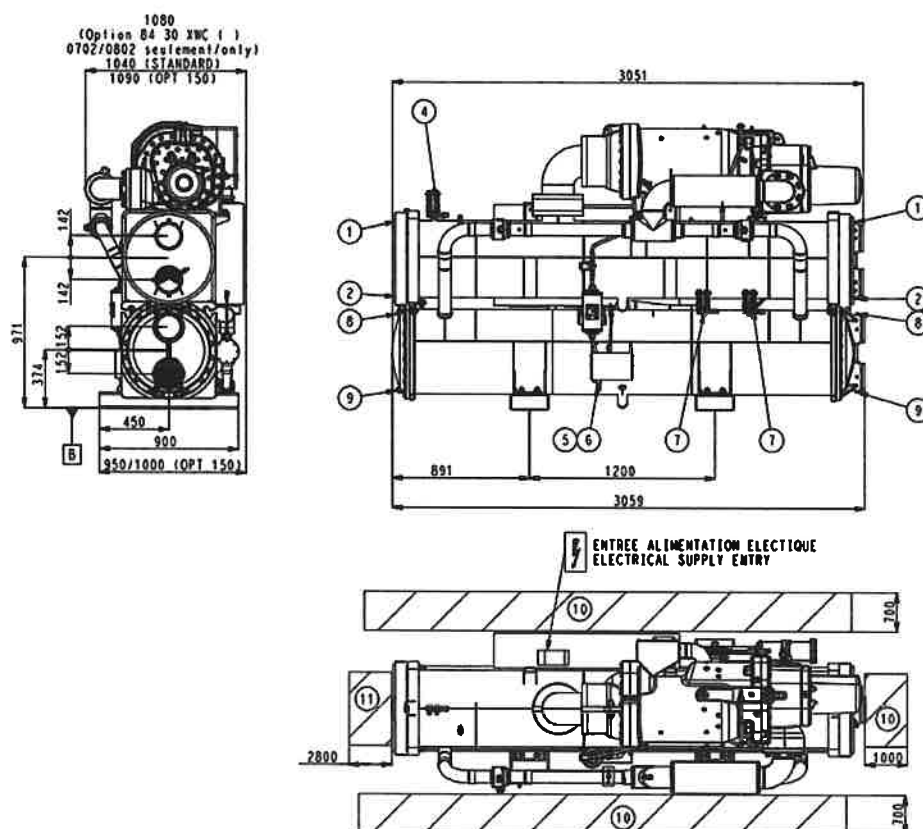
Manufacturer's Drawing of new unit 30XW 0652B [4.1].
